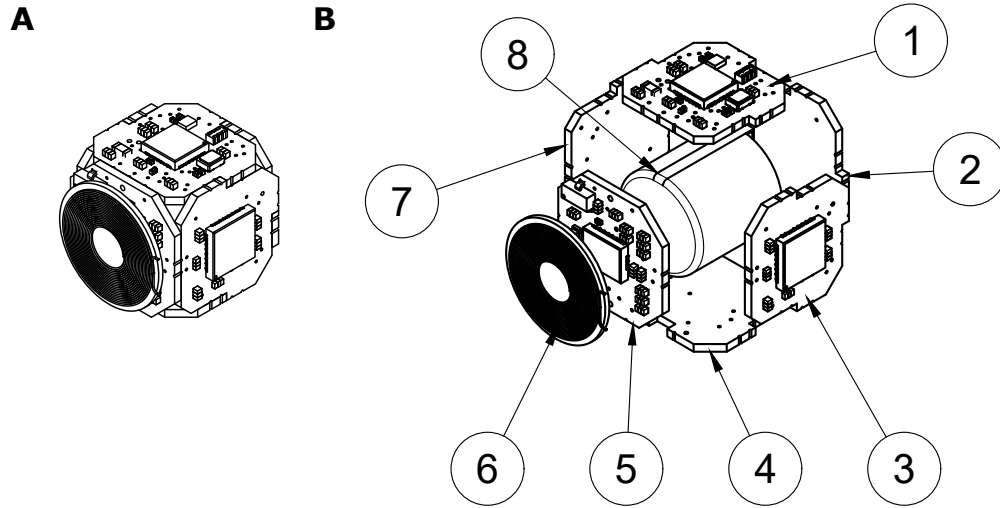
Normal view (A) and exploded view (B) of the assembly of the BIRD Next sensor. 1) Main controller board. 2) Antenna board. 3) X axial accelerometer board. 4) Z axial accelerometer board. 5) Wireless charging board. 6) Charging coil. 7) Y axial accelerometer board. 8) Lithium-ion polymer battery.
